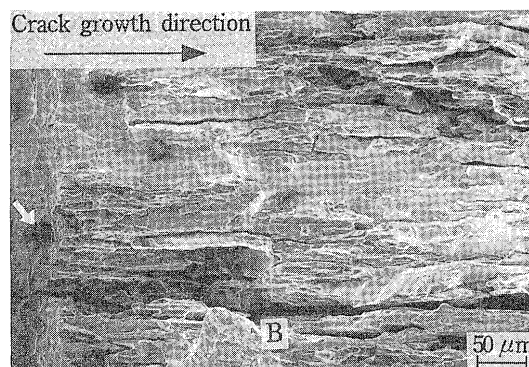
Fracture surface of SP and CM materials on tension test.
